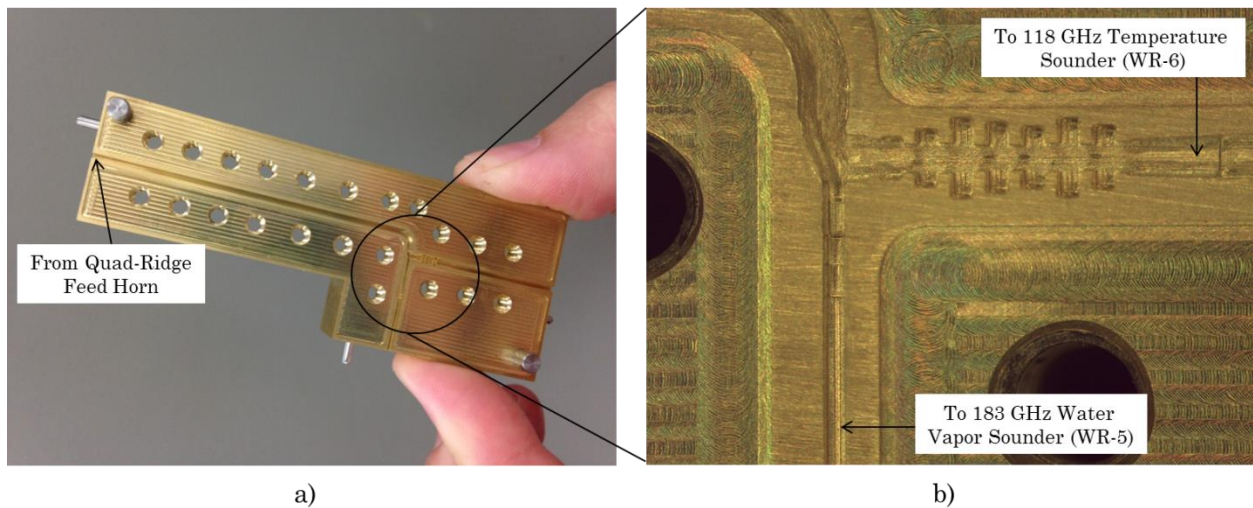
a) mm-Wave Machined Diplexer and b) Zoomed Image of mm-Wave Machined Diplexer
